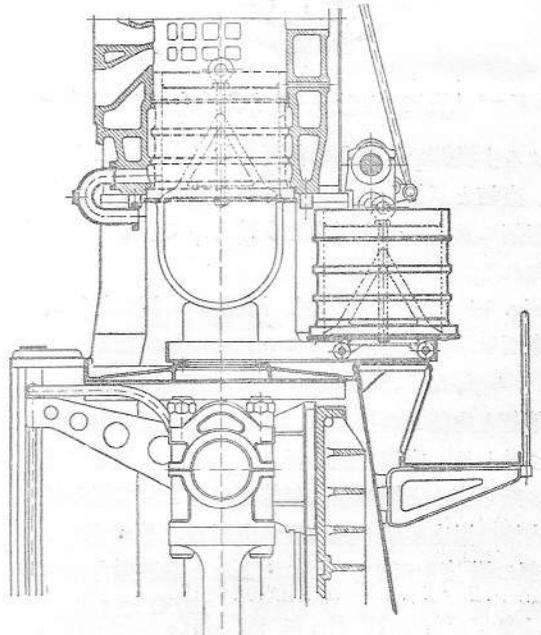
M.A.N. Double-acting Two-stroke Cycle Diesel Engine—Construction of Lower-cylinder Liner.
